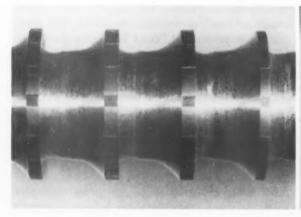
This broach failure was caused by improper grinding, which resulted in overloading by chip curling too tightly.
